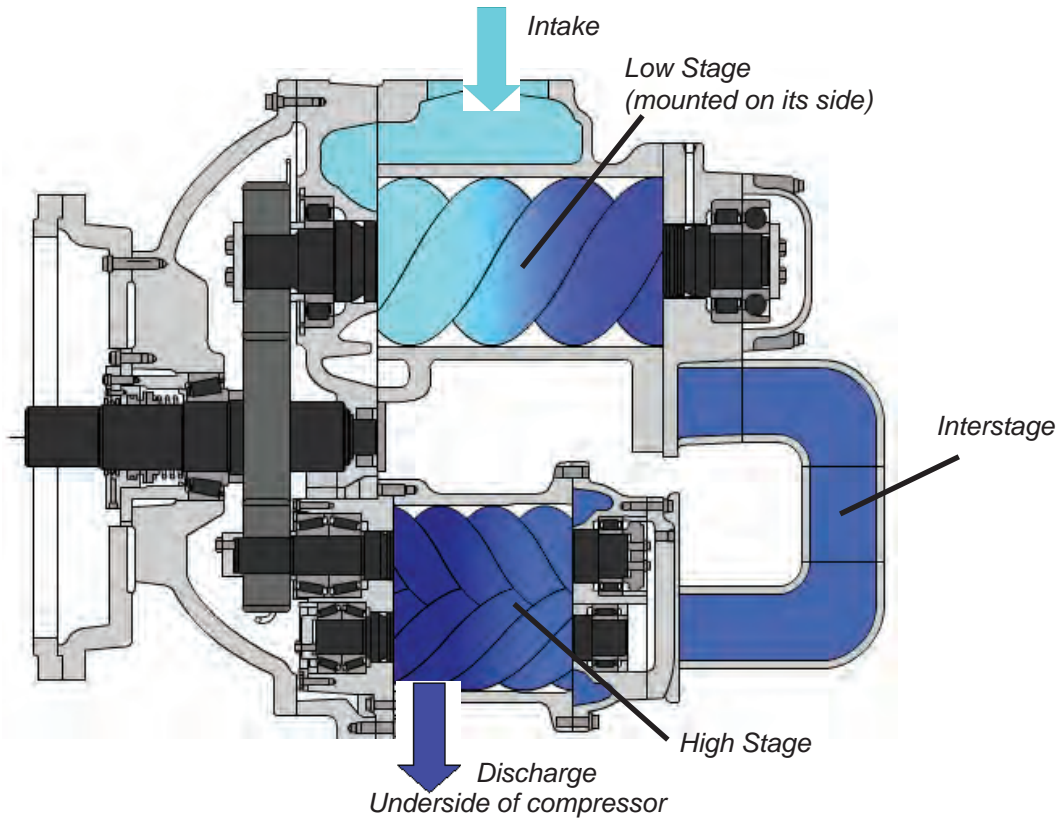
Compressor Unit Air End (2 Stage only)
